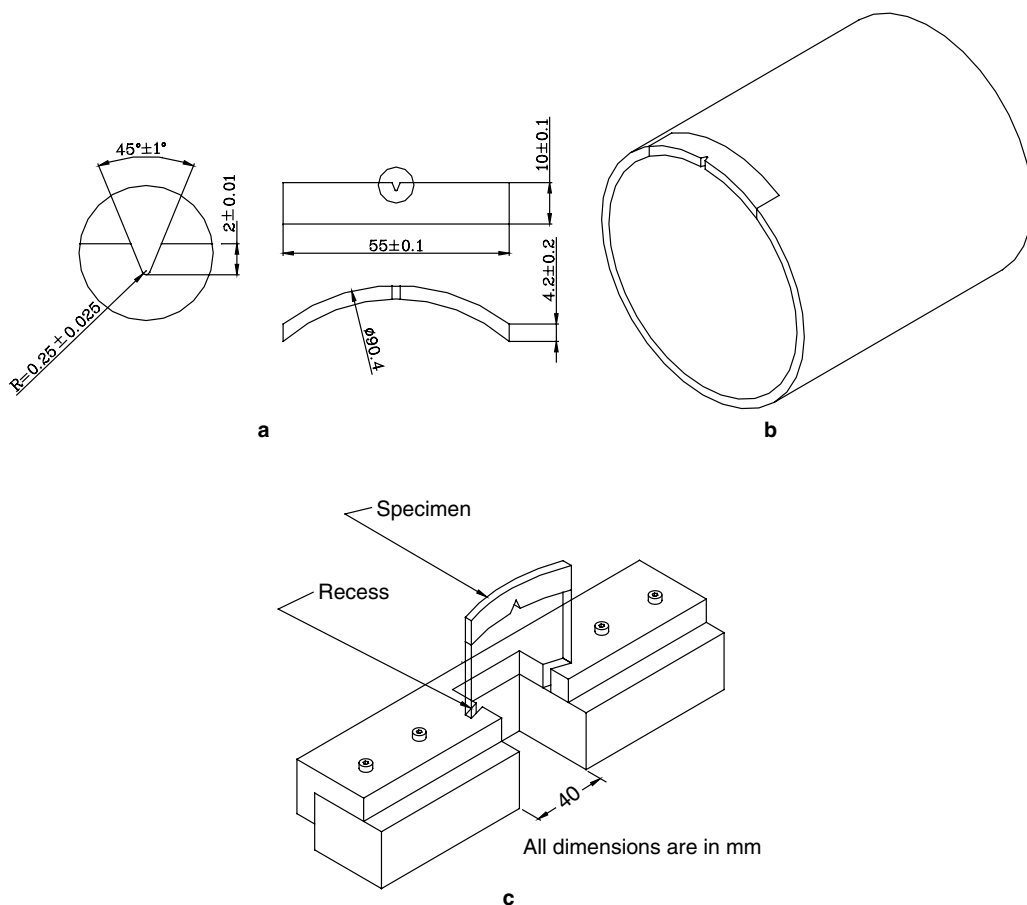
Schematic diagrams of (a) curved Charpy specimen, (b) specimen location on the tube and (c) fixture for holding the specimen during test.
